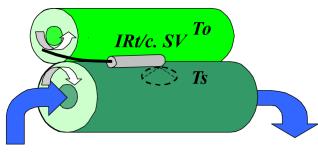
Cooling roll controlled by IRt/c sensing inked surface temperature.
